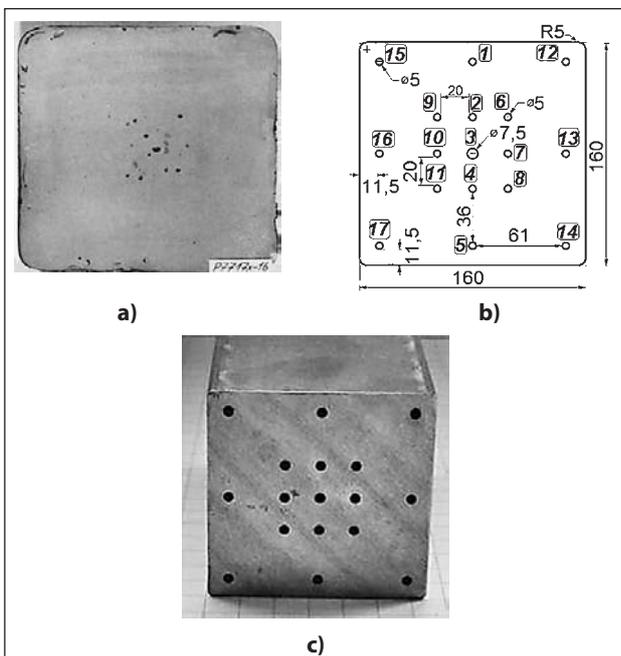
An image of a sample with placed defects simulating internal and subsurface bubbles: a) actual defects; b) designed defects; c) steel sample
